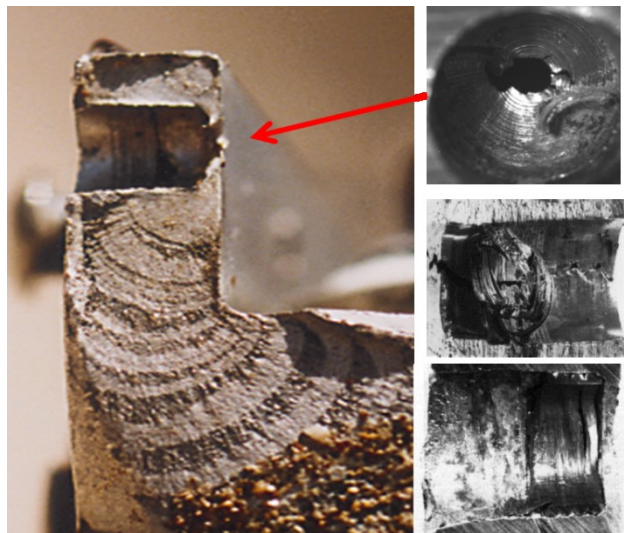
Fracture surface from failed Macchi wing spar, showing manufacturing damage which promoted cracking, and manufacturing damage in other holes.
